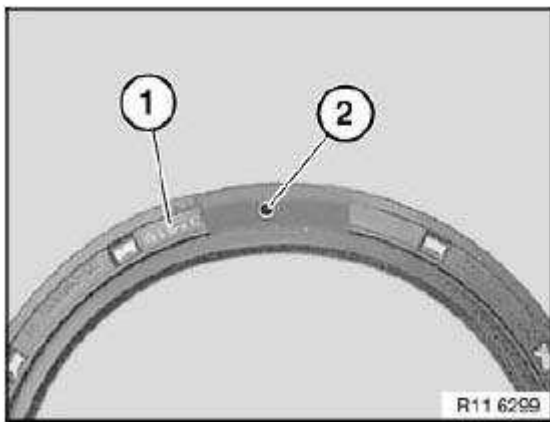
Rubber Coating And Crankshaft Radial Seal Removal Opening
